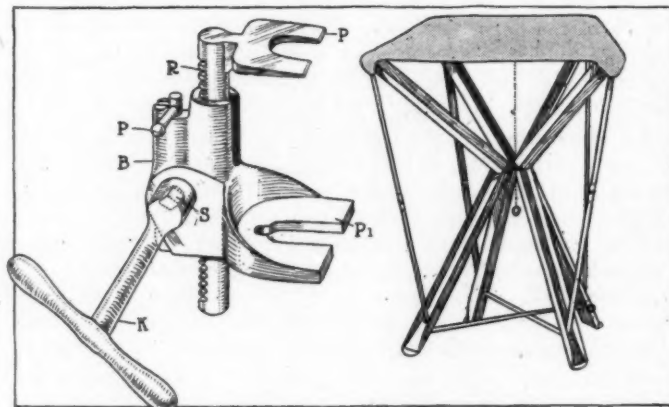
Bryant valve spring remover. Fig. 3—Glendale folding chair
